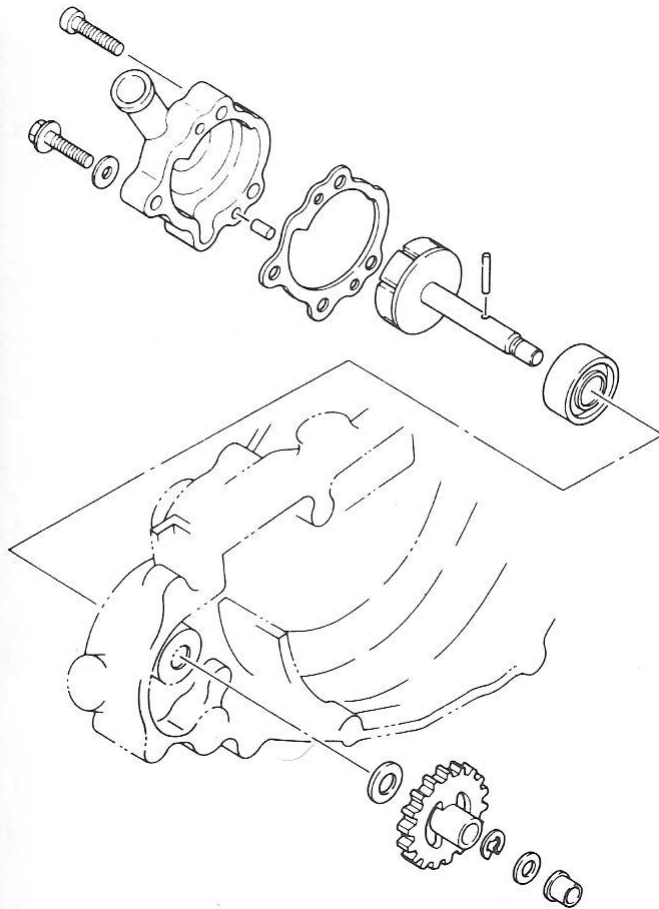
A.23 Water pump components — exploded view (Sec 14)
